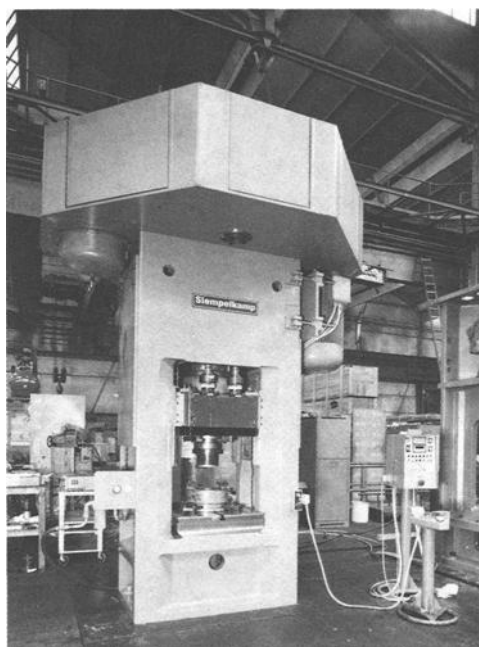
High-energy, fast-acting screw forging press. (Courtesy of Schirmer-Plate-Siempelkamp Hydraulic Presses.)
